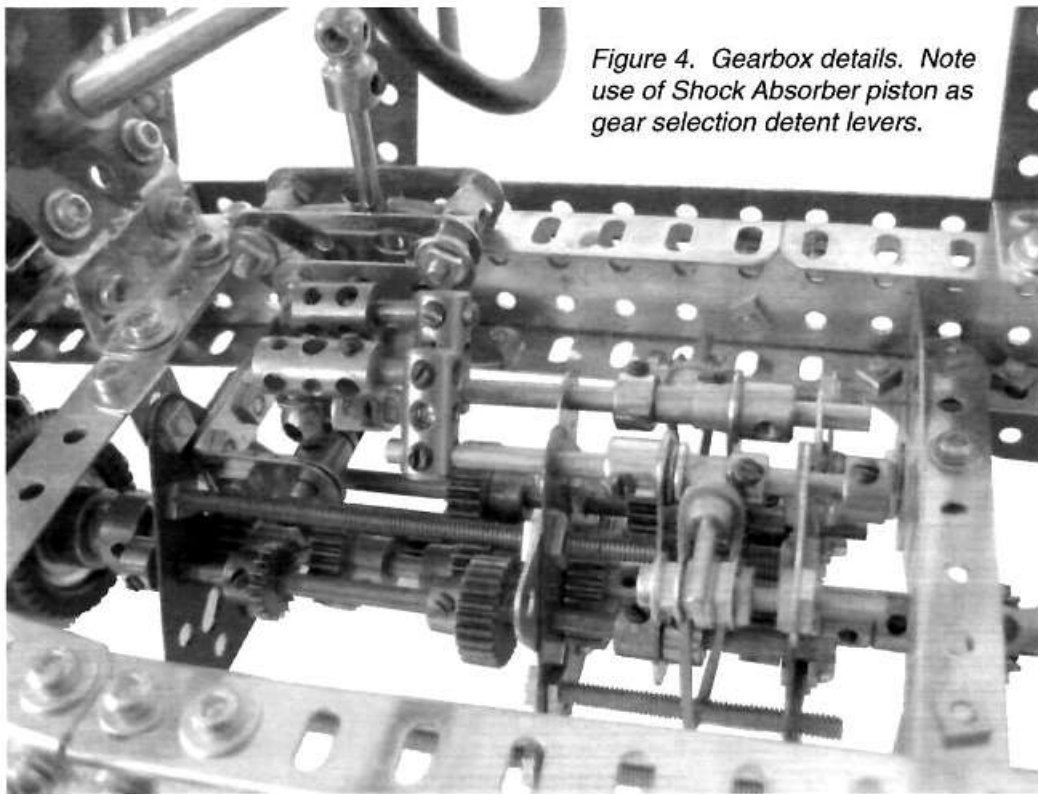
Gearbox details. Note use of Shock Absorber piston as gear selection detent levers.
